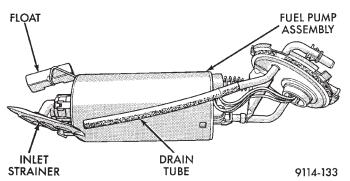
Fuel Pump/Level Unit—Front Wheel Drive
